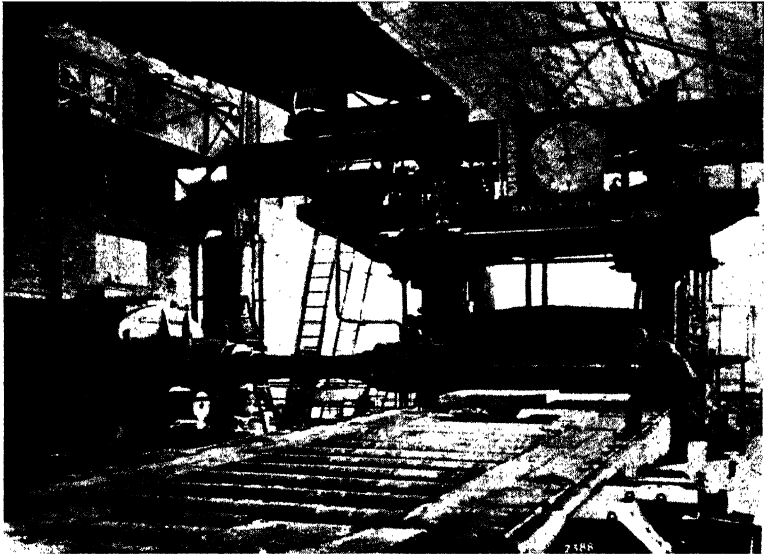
A 36-in. \times 9 ft. 0 in. Three-High Plate Mill.
